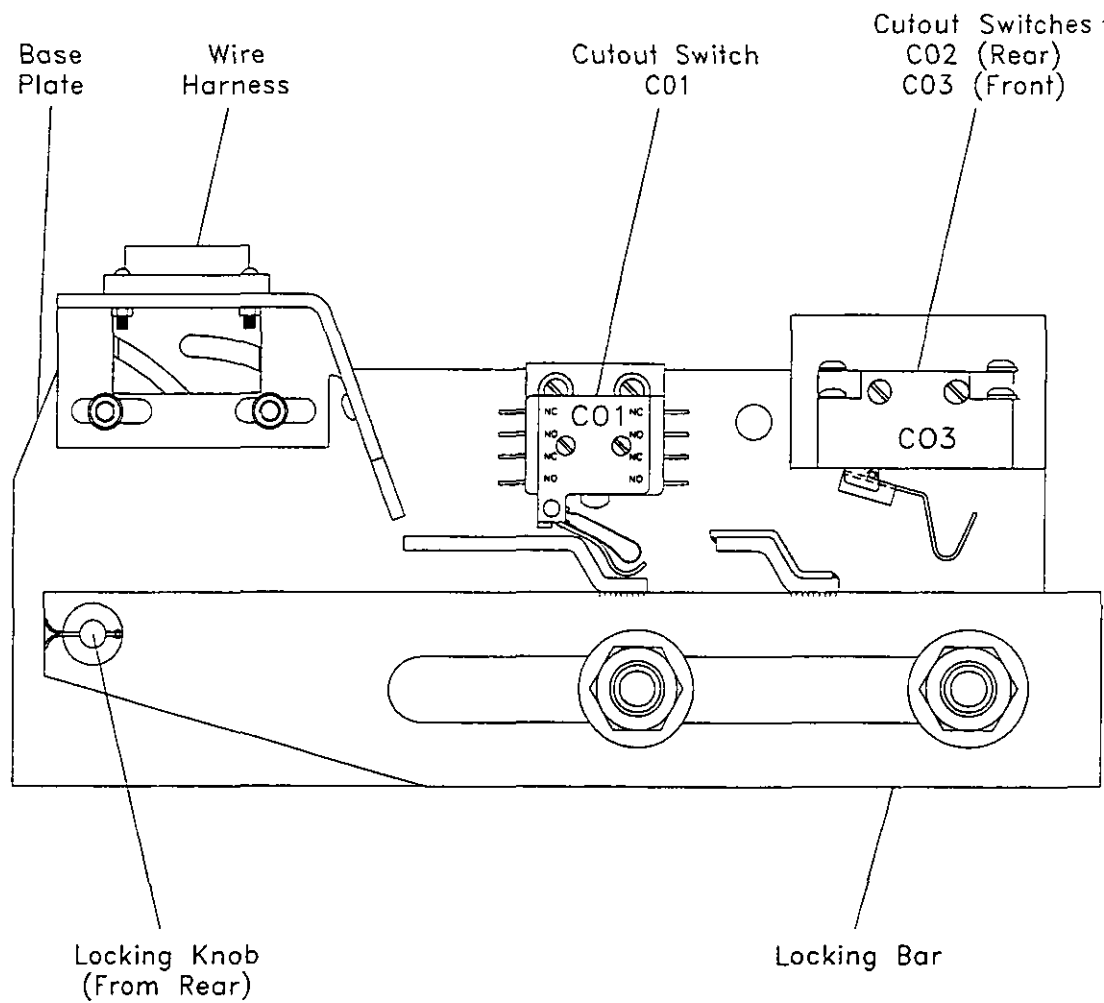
Cutout and Mechanical Lock Assembly
